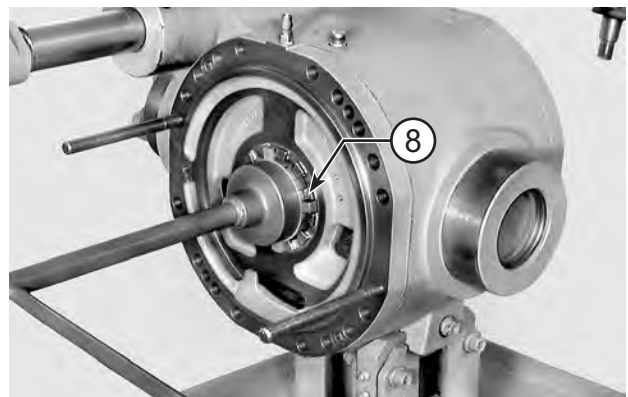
Only if locking piston seal is replaced: make positional match marks across the adjustment ring nut on non-gear ring side.
